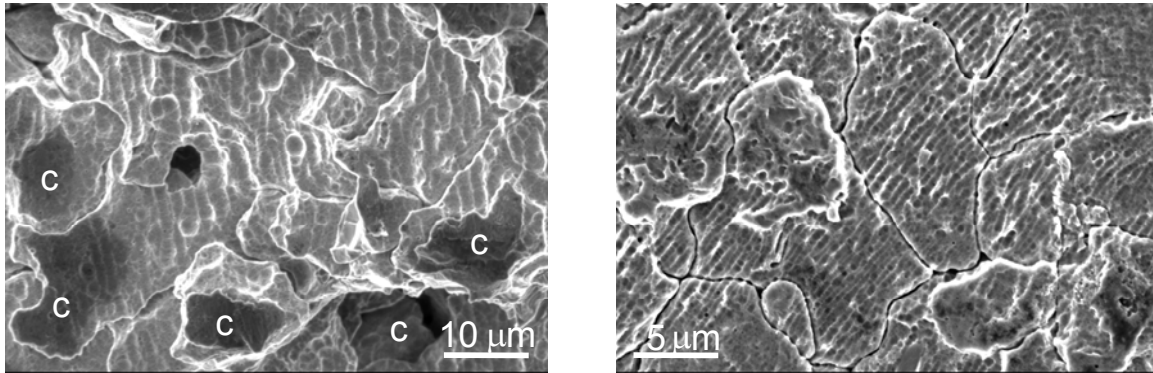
Crack surface after removal of corrosion products, showing striations on the surface.
